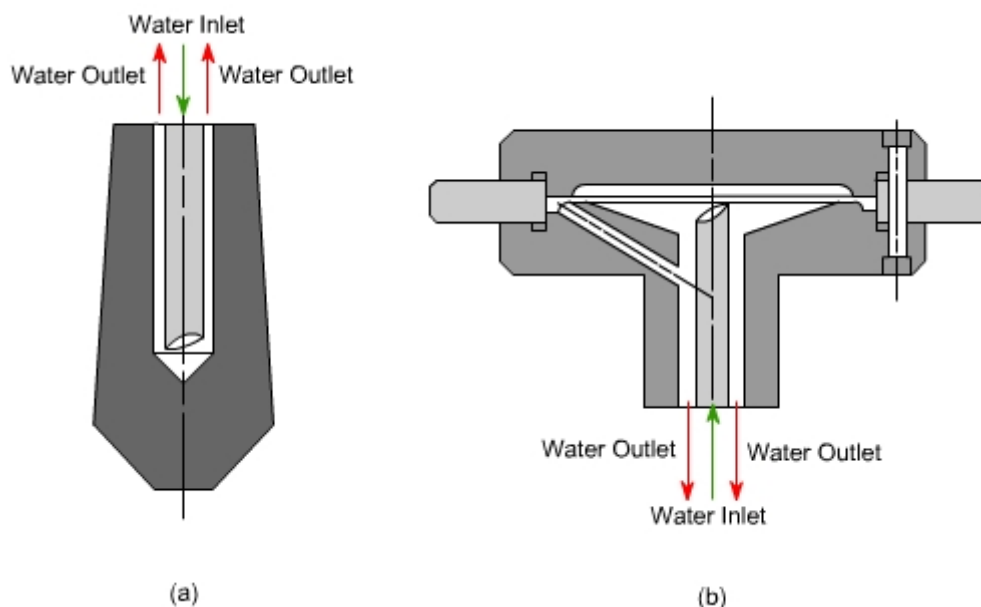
Water Cooling of Electrodes (a) Spot Welding (b) Seam Welding.
